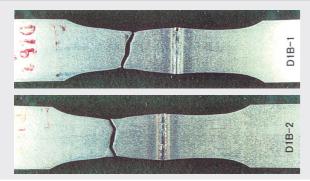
Fracture Conditions in Tension Tests for Butt Weld Joints (thickness: 1.2 mm)
